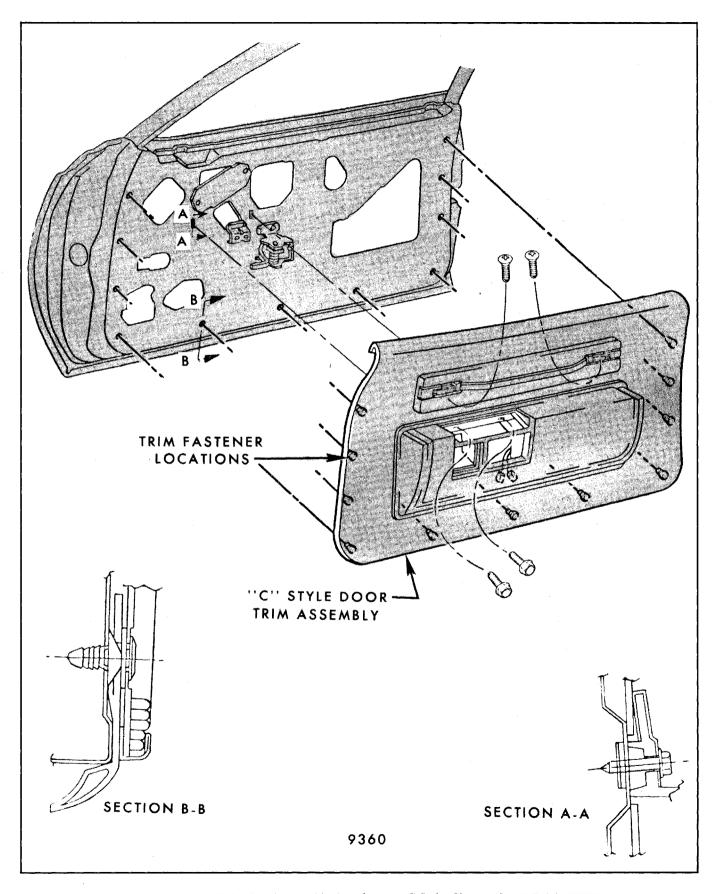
Typical Door Trim Panel Assembly Attachment - C Styles Shown, K and Buick 4BZ37 Similar
